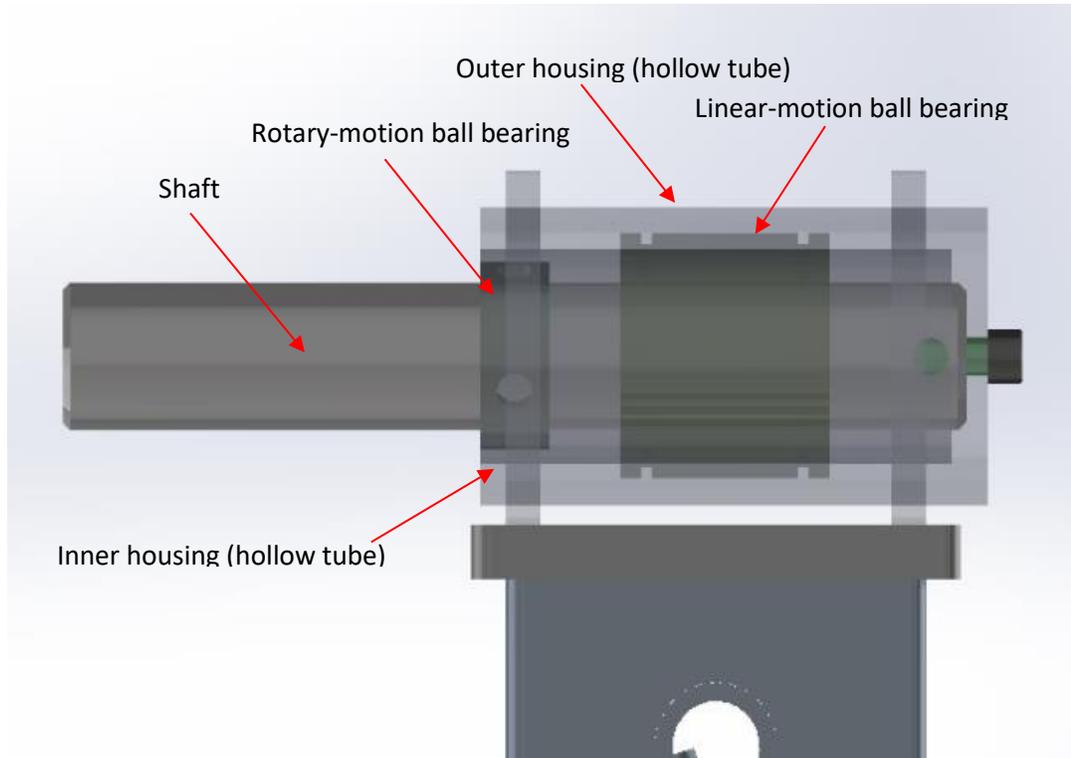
Details of Stand Head of the A-Stand Idle End Design Iteration #1
